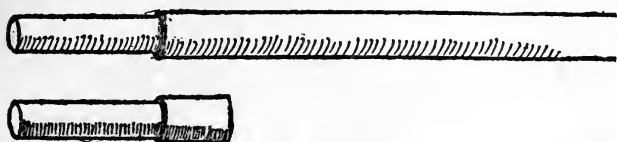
Large End of Tip, Shouldered to Fit a Capped Ferrule Center.
